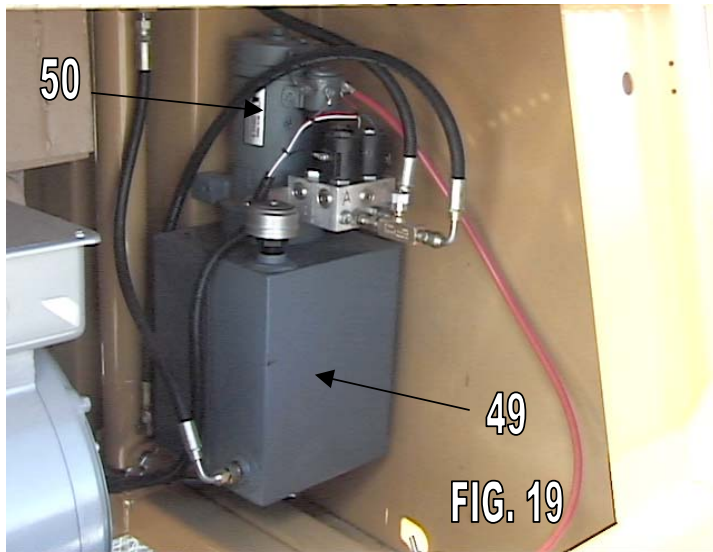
HYDRAULIC PUMP ASSEMBLY
